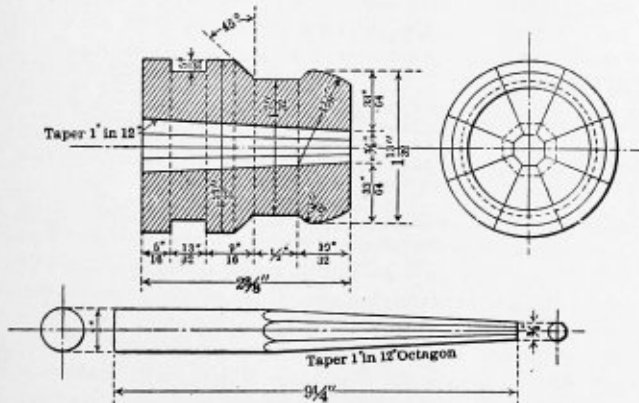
GENERAL CONSTRUCTION OF SECTIONAL EXPANDER
